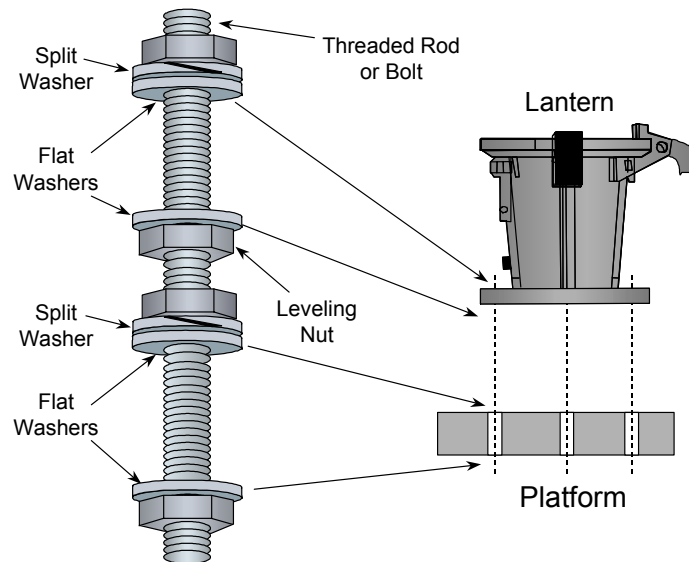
Mounting a 155mm Buoy Lantern to a Structure.
